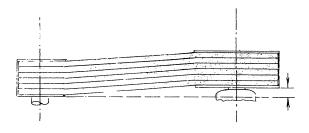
Method of Aligning Flywheel and Motor Pulley
